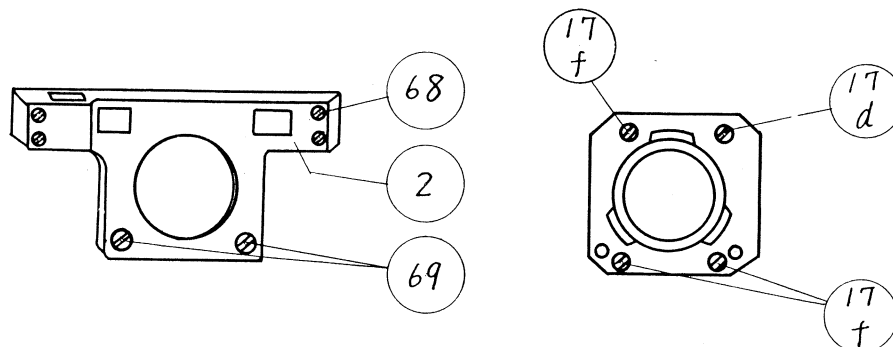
Removal of Front Cover and Focusing Mount assembly
